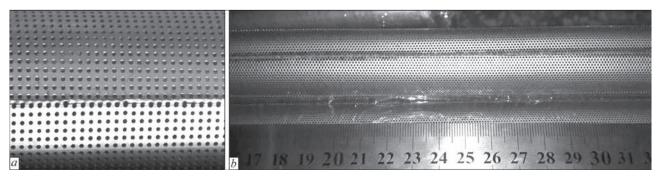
View of welded joint (*a*) and specimen (*b*) of filter element of stainless steel 08Kh18N10T ($\delta = 0.5$ mm), produced by laser welding with powder filler PG-10N-04
